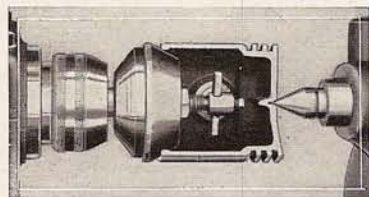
Cross Section View of Piston Showing Use of Piston Adapter.
